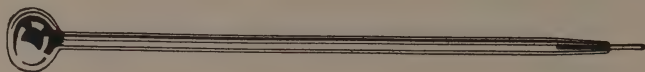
Pin vise for holding vertical pins while soldering.
